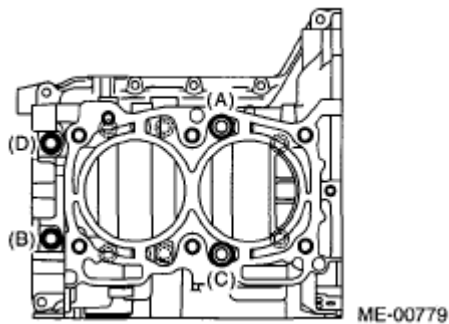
Identifying Cylinder Block Connecting Bolts Tightening Sequence (LH Side)
